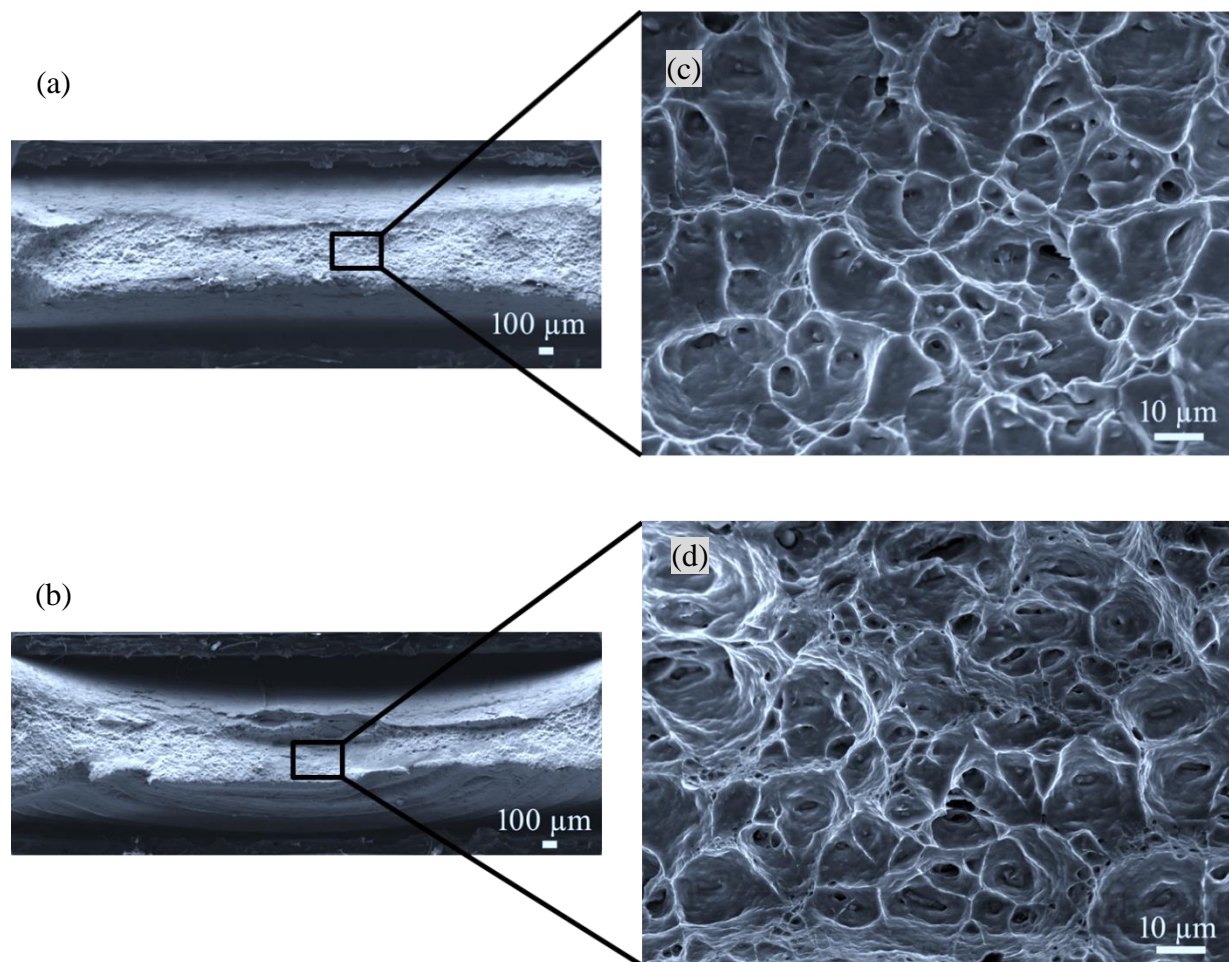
(a, b) SEM macro-fractography of the broken tensile specimens in the BM and the FSW weld sequentially; (c, d) enlarged views of the regions marked with black rectangles in (a, b).
